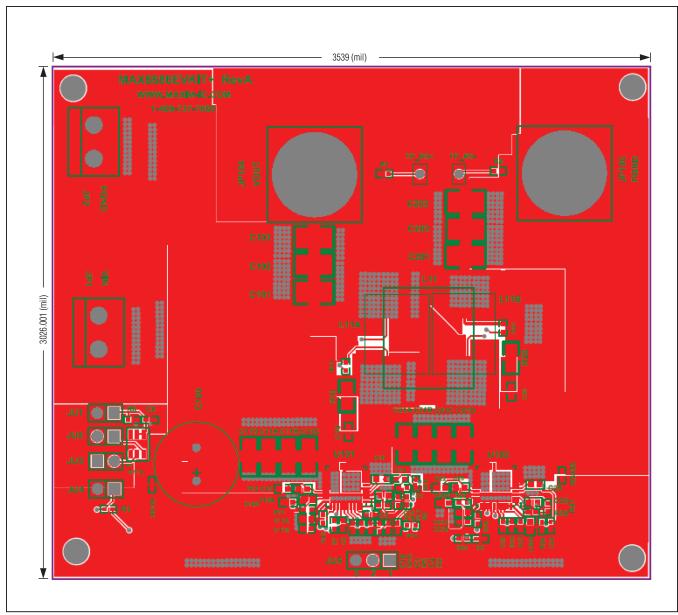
MAX8686 EV Kit PCB Layout—Component Side
